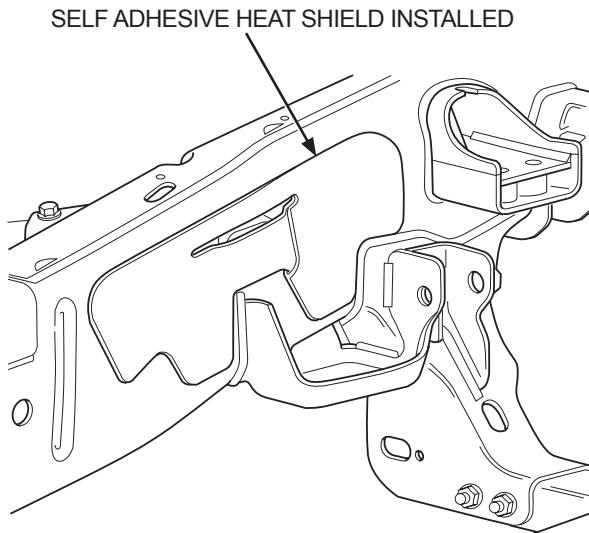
CREW CAB FRAME SHOWN FOR ADDITIONAL ASSEMBLY REQUIREMENTS
